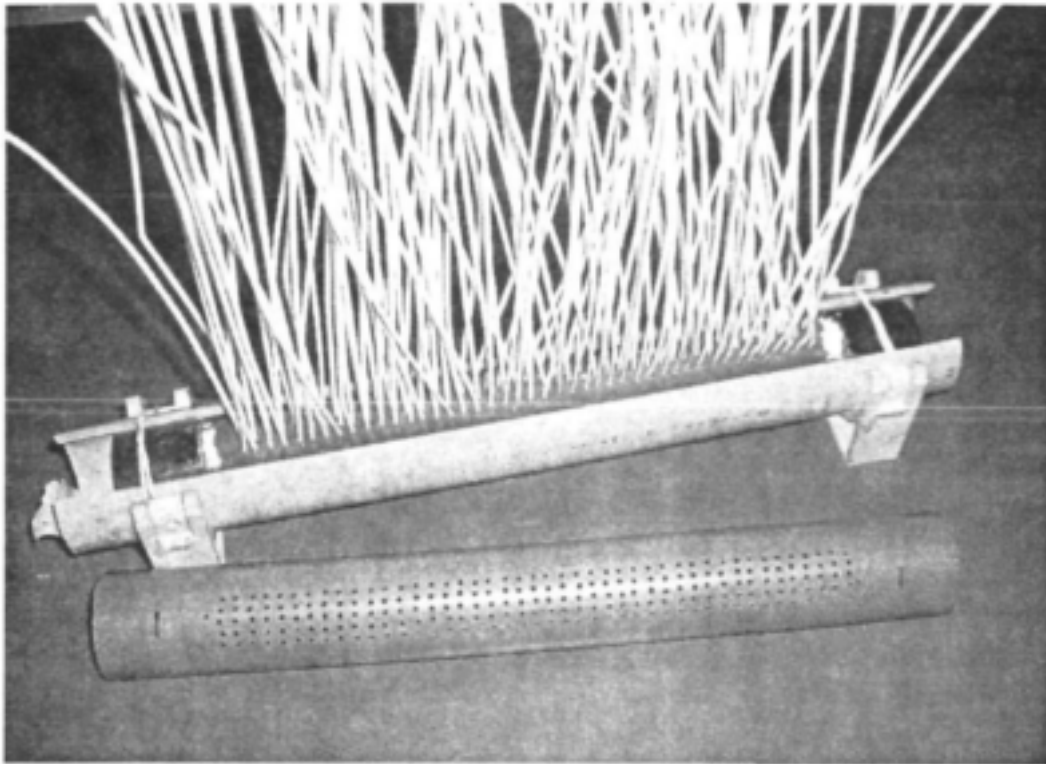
A further view of the casting mould and a pre-drilled manifold.
